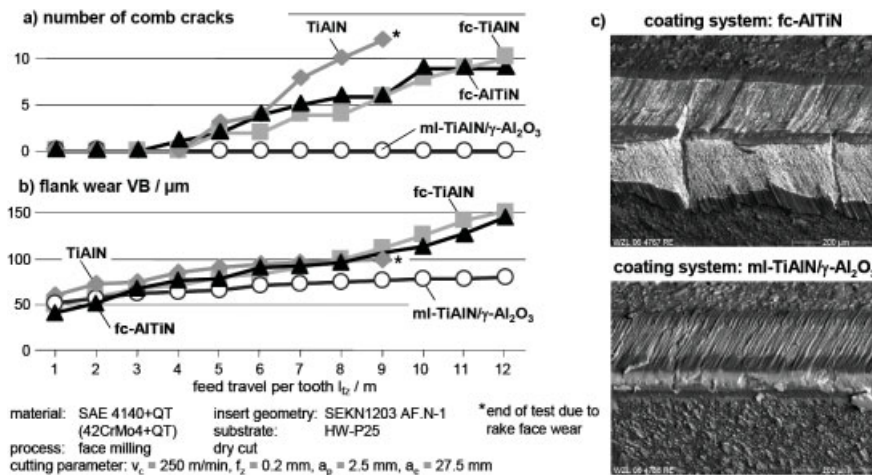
Effect of the coating system on the formation of comb-like cracks in the insert and on tool-flank wear.
